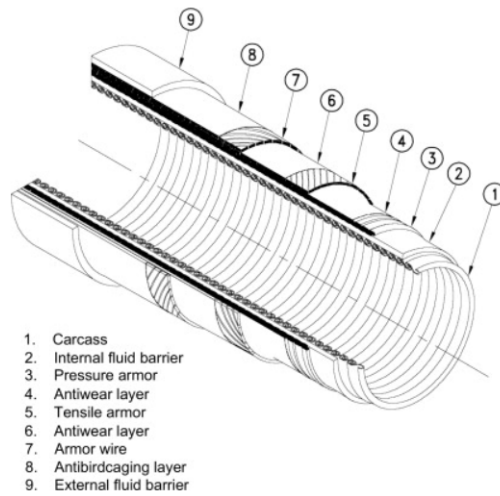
Typical cross section of an unbonded flexible pipeline (Bai and Bai, 2014)
